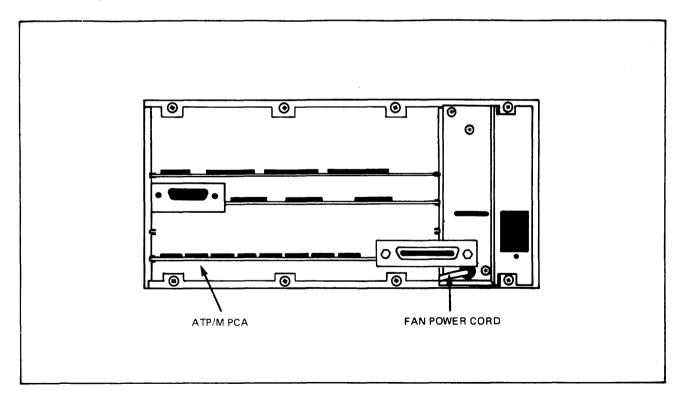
MICRO 3000 SPU Rear Panel Removed
